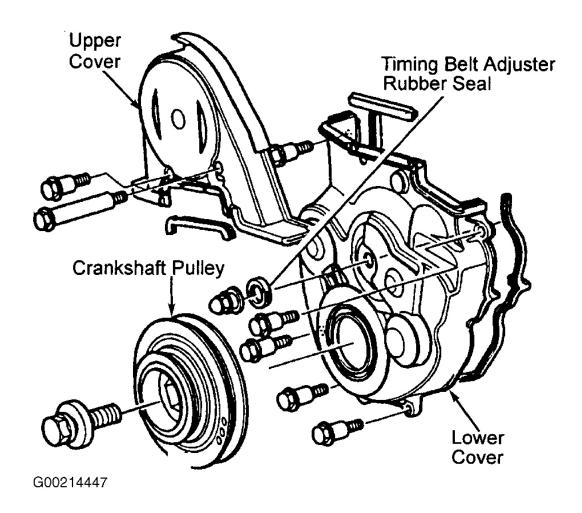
Removing & Installing Crankshaft Pulley (Typical) Courtesy of AMERICAN HONDA MOTOR CO., INC.
